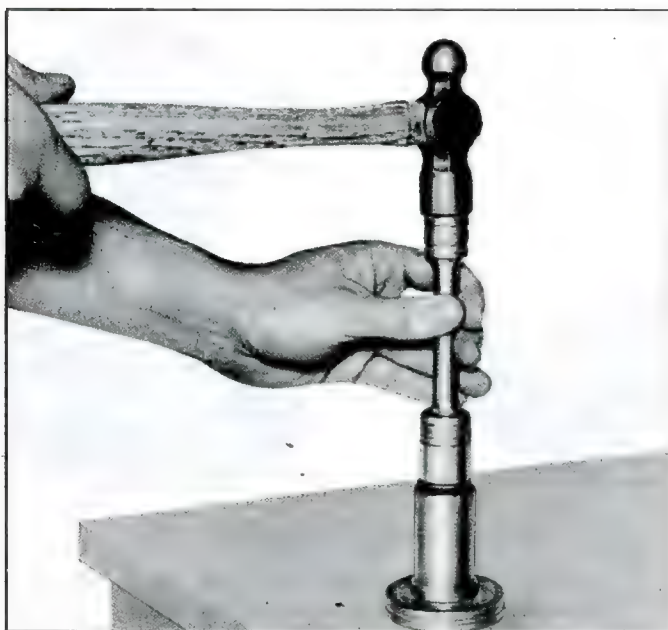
Installing Clutch Release Bearing Shaft Seal with 3/4" Socket
